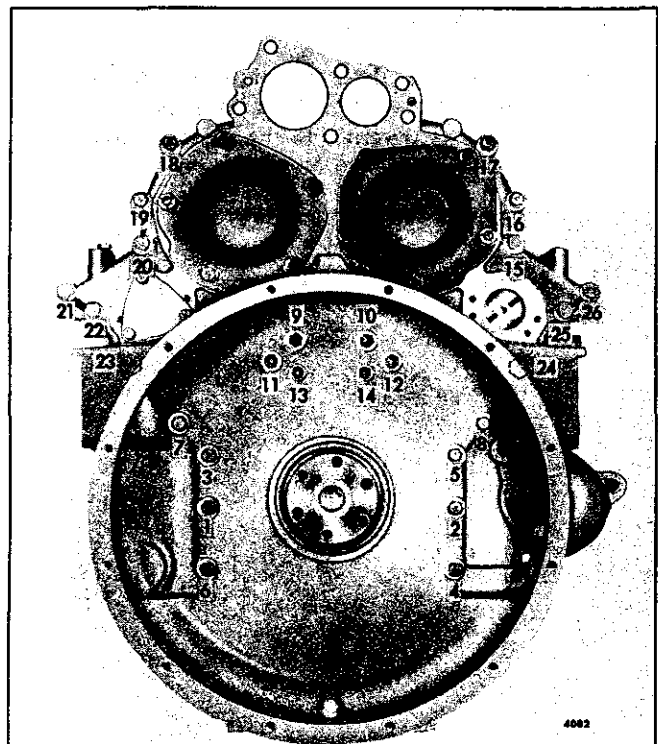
Flywheel Housing Bolt Tightening Sequence (Operation 2)—6V Engine
